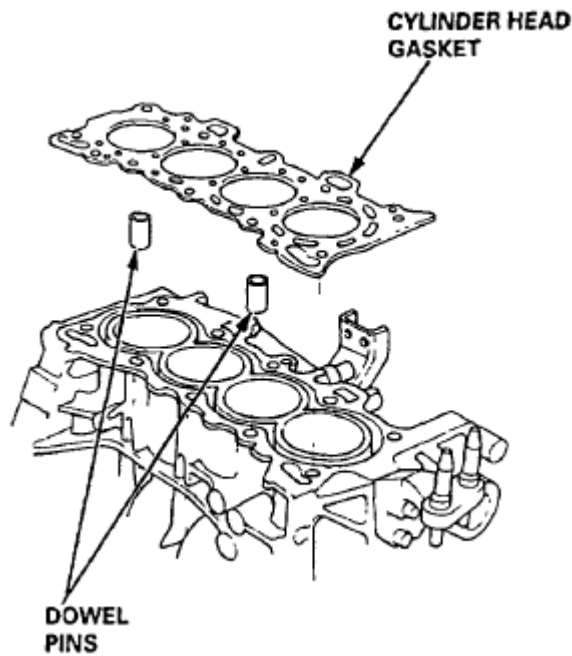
Identifying Cylinder Head Gasket And Dowel Pins
